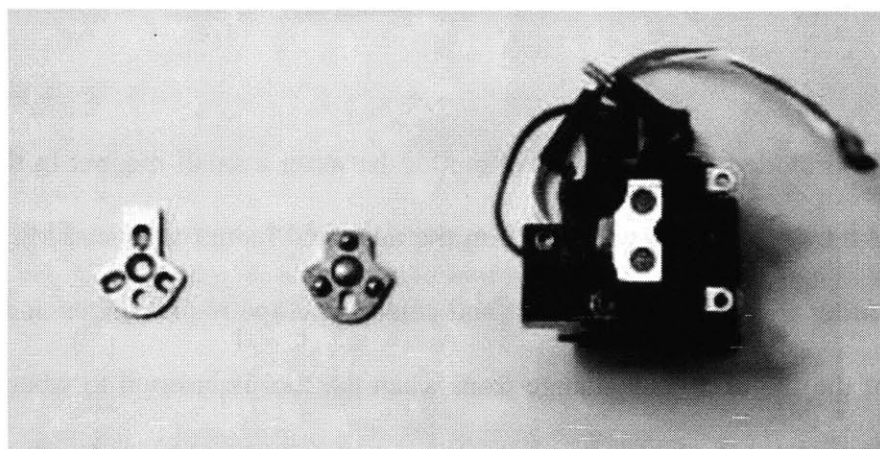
Fixture ball and groove sides with DPN 5000 universal mount
